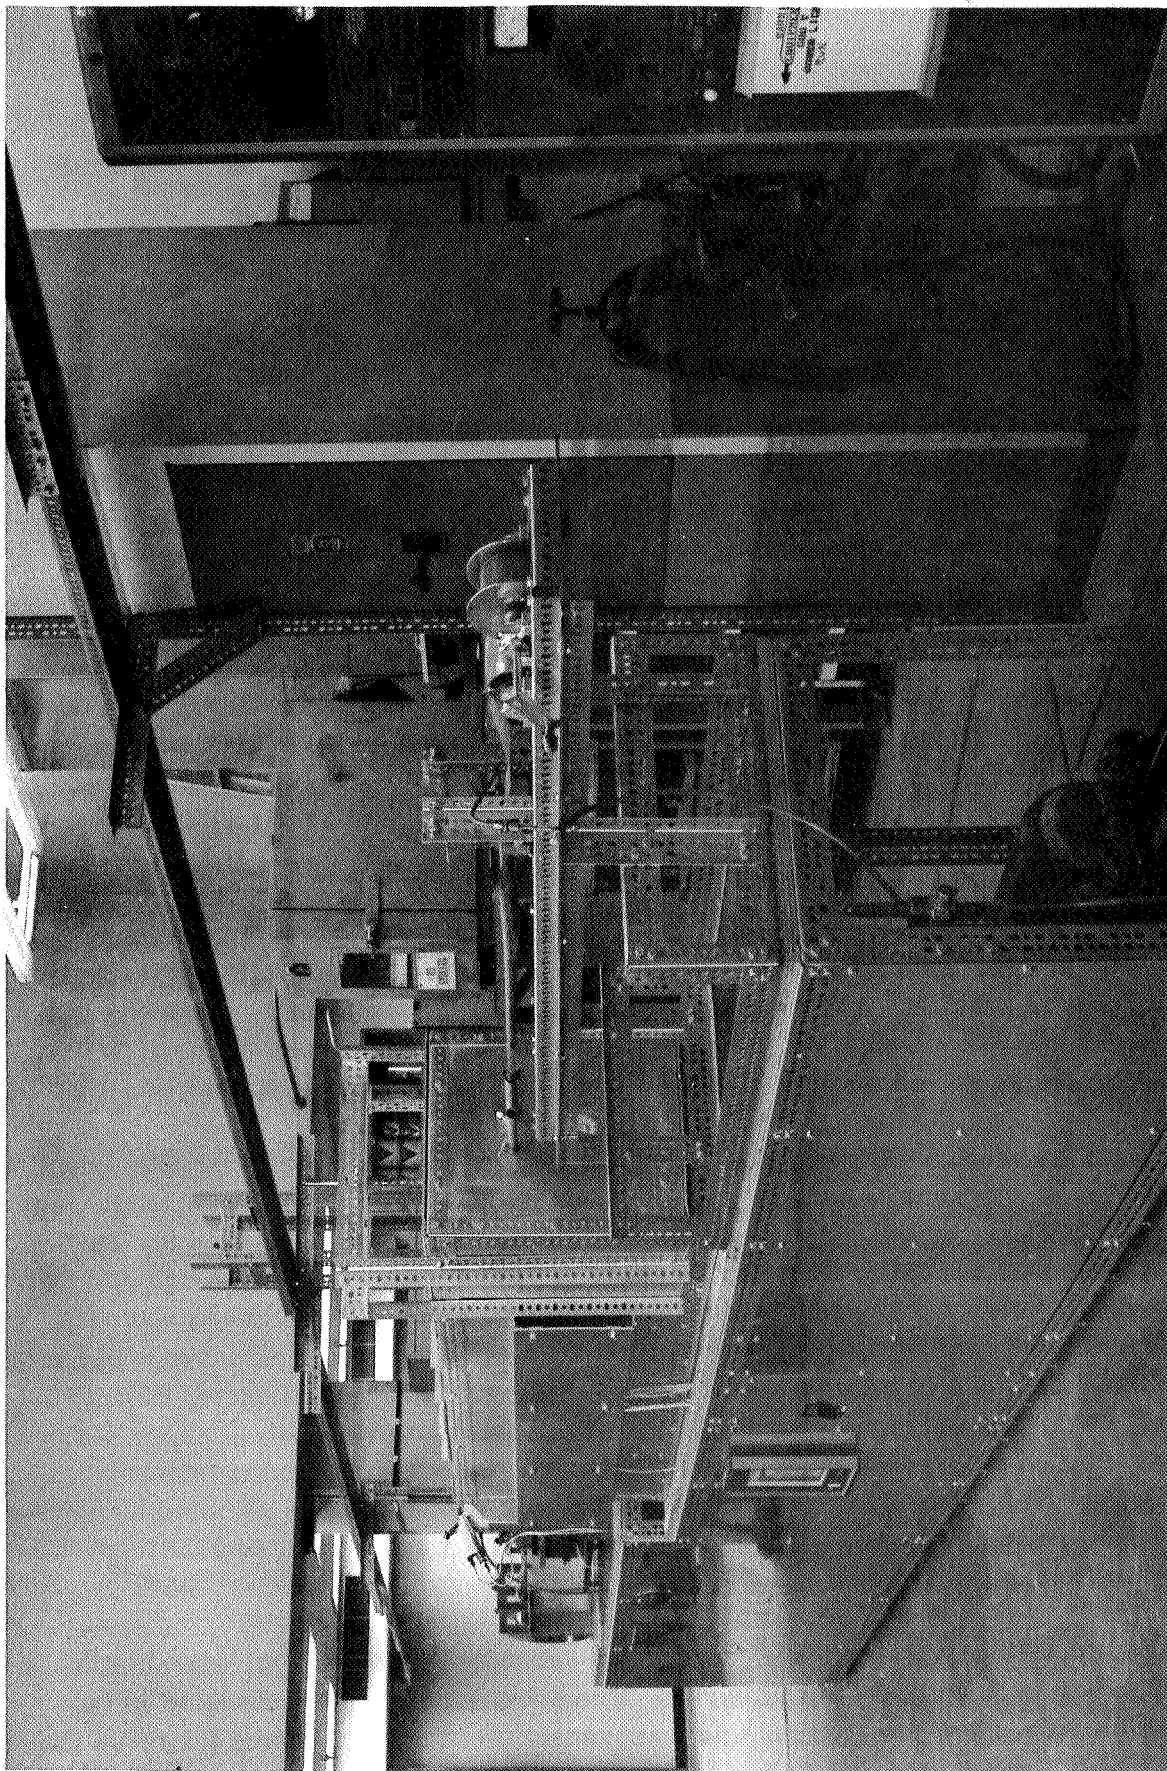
MOD II Continuous Tube Forming Equipment, Overall View
